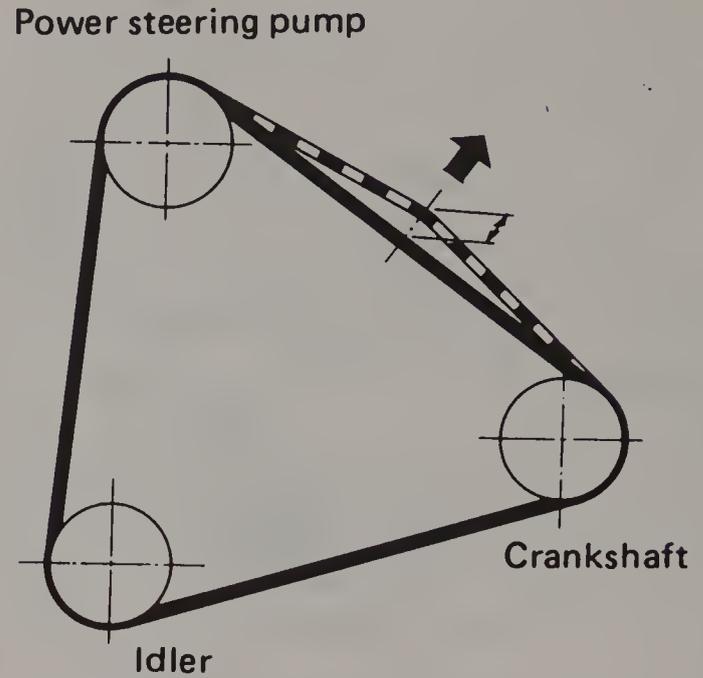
Power steering pump drivebelt tension check (Sec 11)
